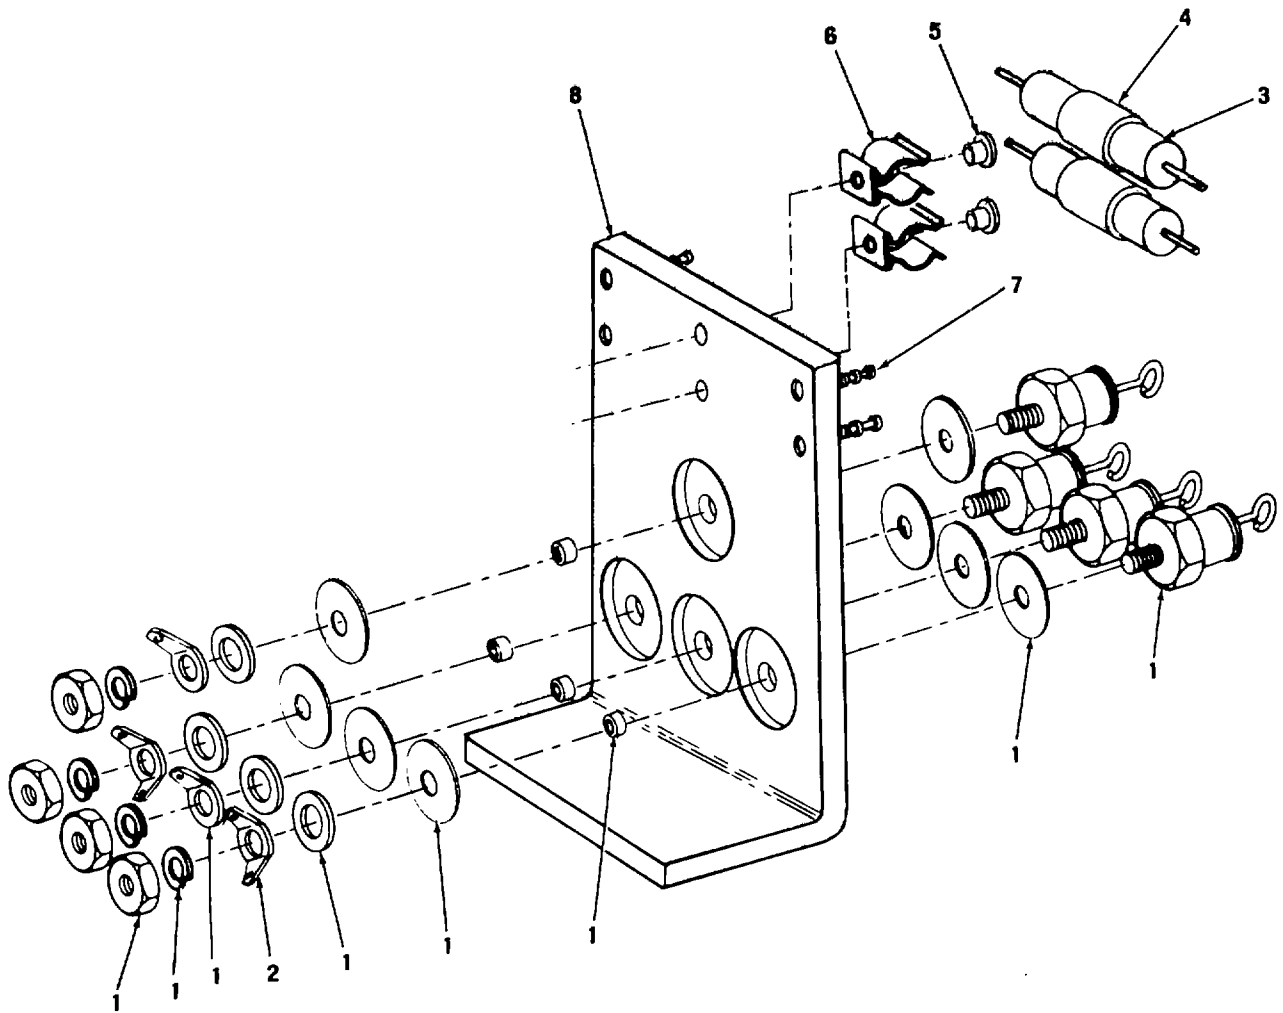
Monitor Cabinet, Type C (CY-7361) Plate Subassembly, Component Mounting
